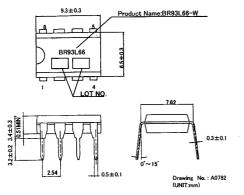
(a) PHYSICAL DIMENSION DIP8 (BR93L66-W)
